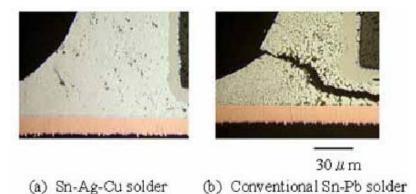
Cross-sectional Photographs of Chip Components Solder Joints after Thermal Cycle Test for 3,000 cycles 14
